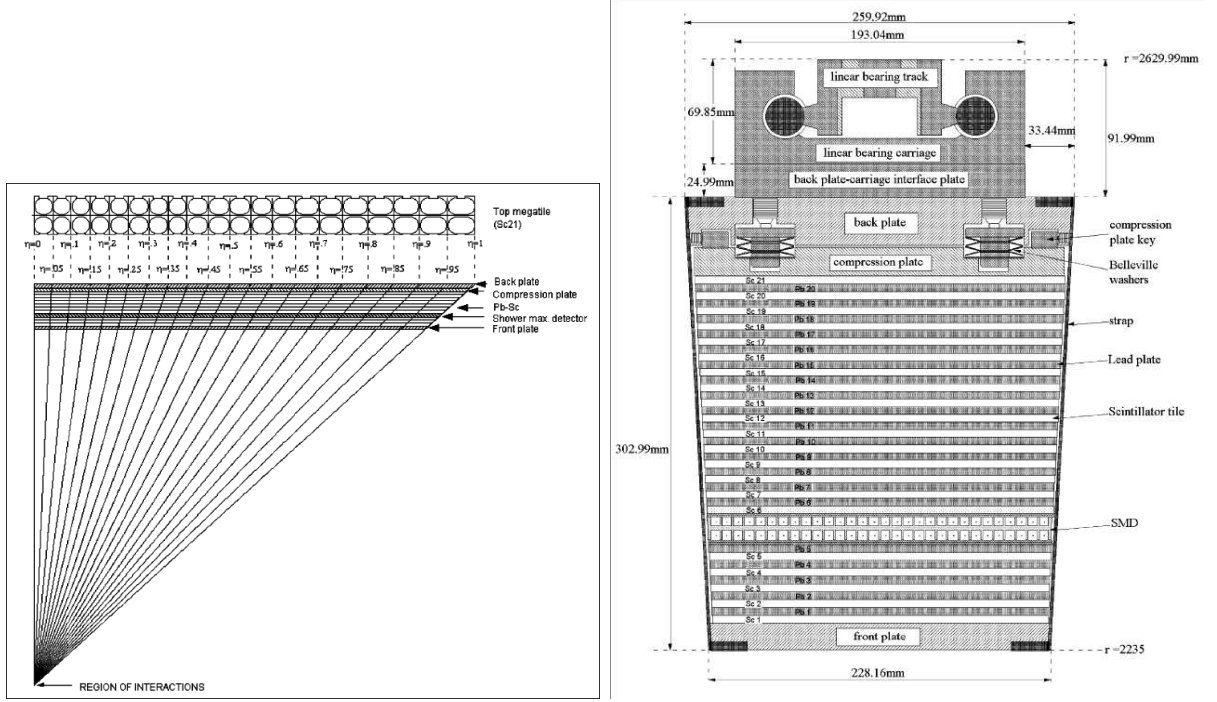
The schematic view of BEMC module. Left panel: schematic side view of a module in η direction. Right panel: side view of a module showing the mechanical assembly including the compression components and the rail mounting system. The plots are obtained from [Bed03].
